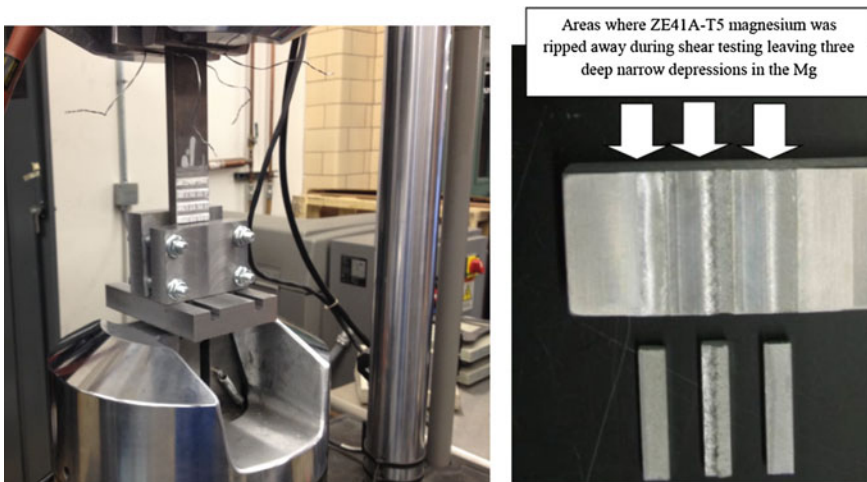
Triple Lug Shear test setup (*left*), and tested coupon after cold spray, but without FSW (*right*)
